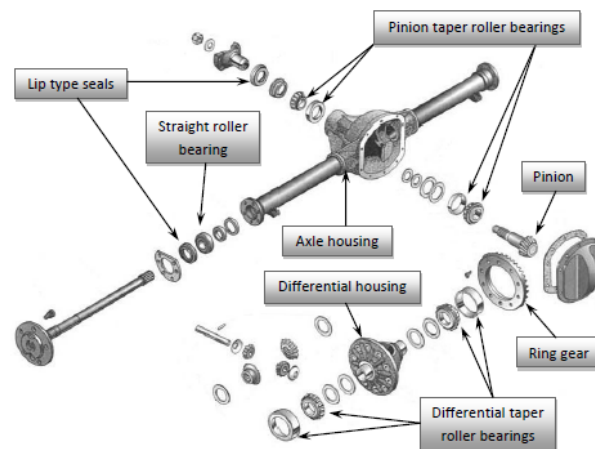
Dana 44 Rear Semi-floating Axle exploded view.
